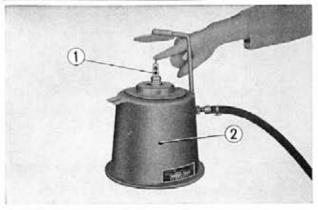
① Spark plug ② Spark plug cleaner
